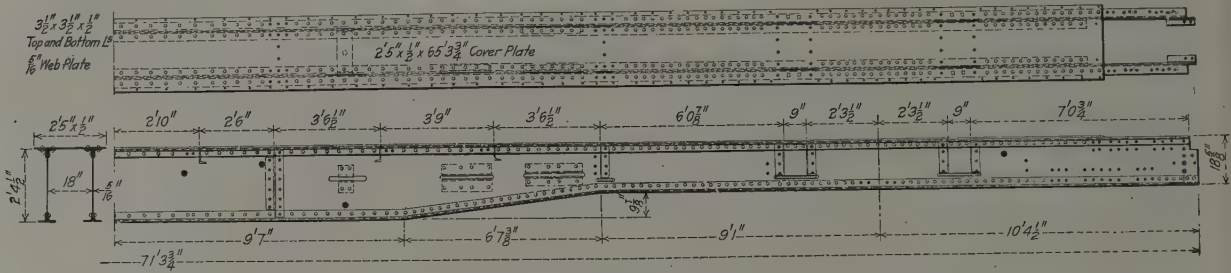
Center Sill Construction of Central Railroad of New Jersey Steel Baggage and Postal Car.
